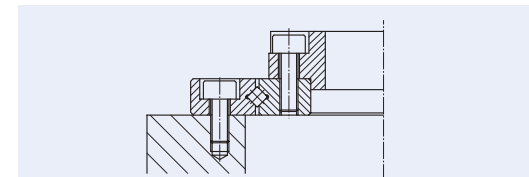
Example of direct mounting to the mating surface of Mounting Holed Type Super Slim Crossed Roller Bearings
